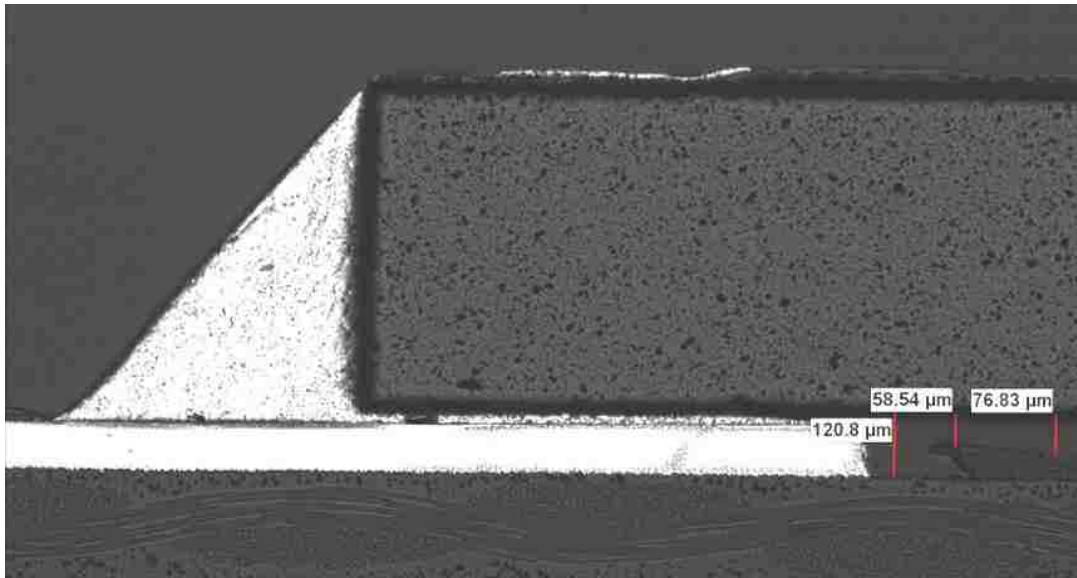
Cross-sectioned “small” resistor with intact solder joint.
